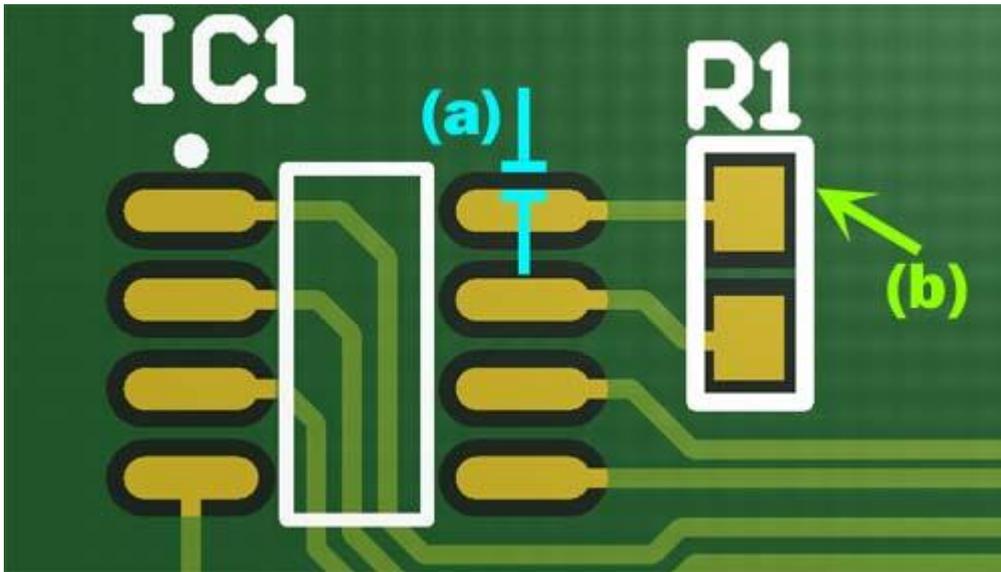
Soldermask expansion (a) and silkscreen (b)
